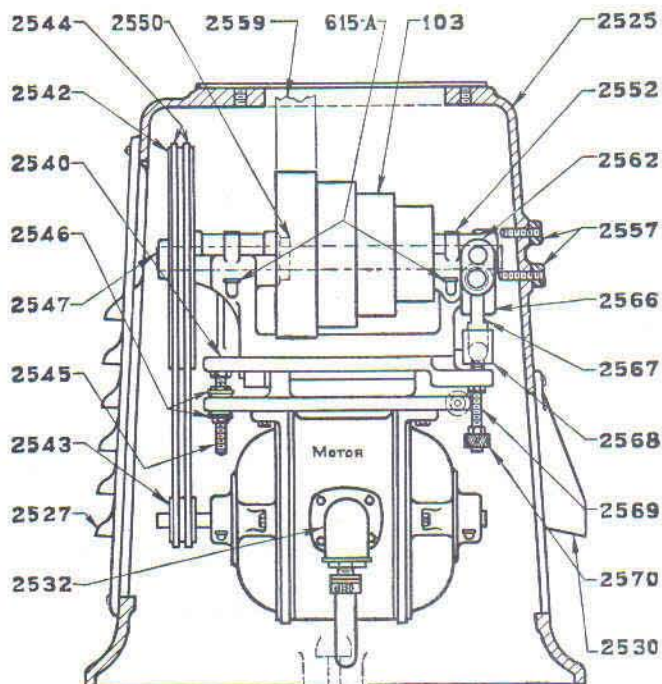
Front View Drawing Showing Position of Parts of Underneath Belt Motor Drive Unit in Assembly.
